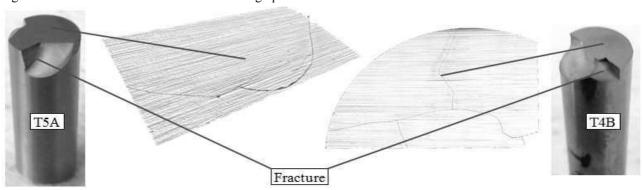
Damage to the workpiece during test T5A and T4B
